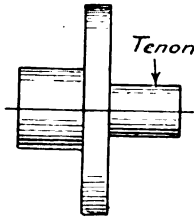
SKETCH SHOWING HOW PATTERN FOR GLANDS MAY WITH ADVANTAGE BE MADE.
